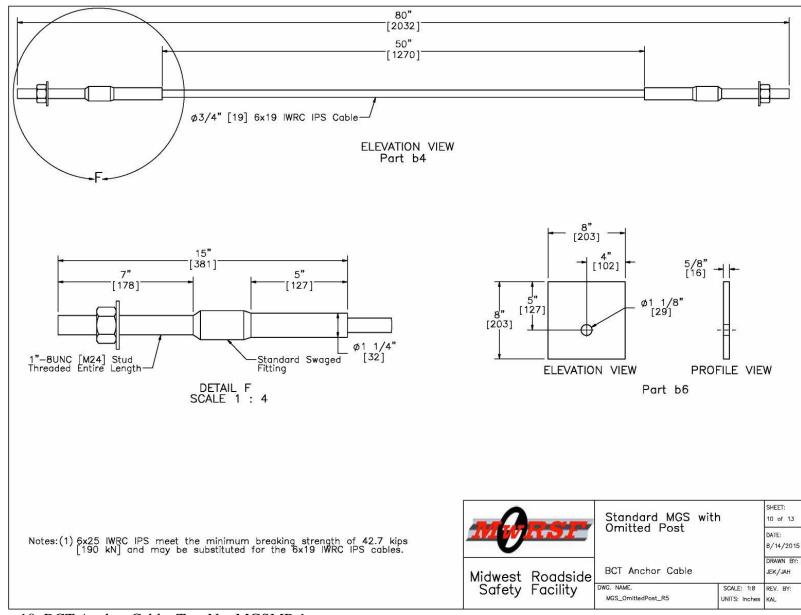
BCT Anchor Cable, Test No. MGSMP-1
